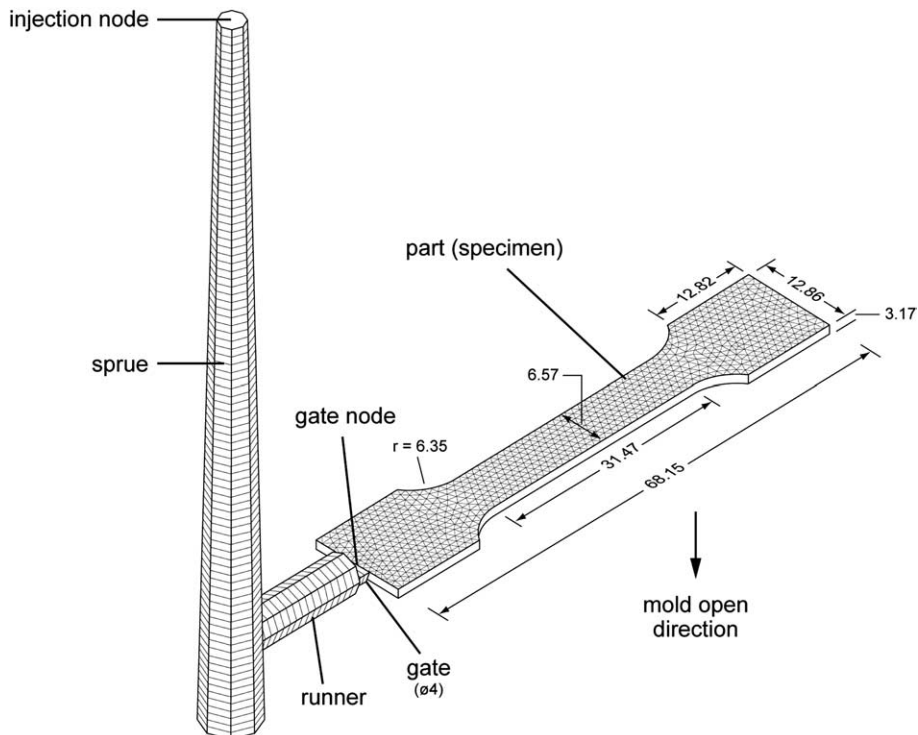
Injection molded part and geometry of sprue, runner, gate and tensile test sample. All dimensions are in millimeters.
